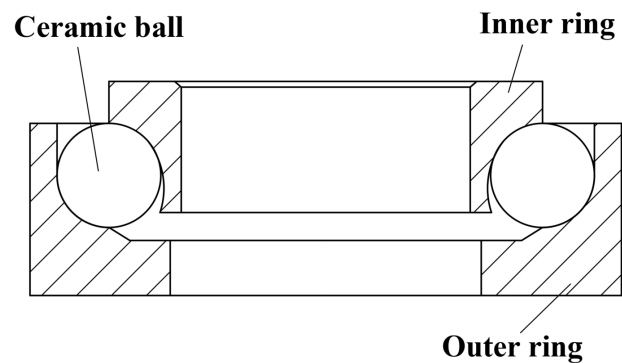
Thrust angle contact ceramic ball bearing CN204344671U.
